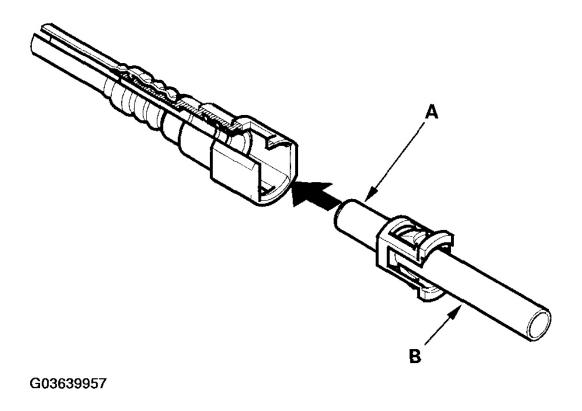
Checking Contact Area Line Courtesy of AMERICAN HONDA MOTOR CO., INC.
